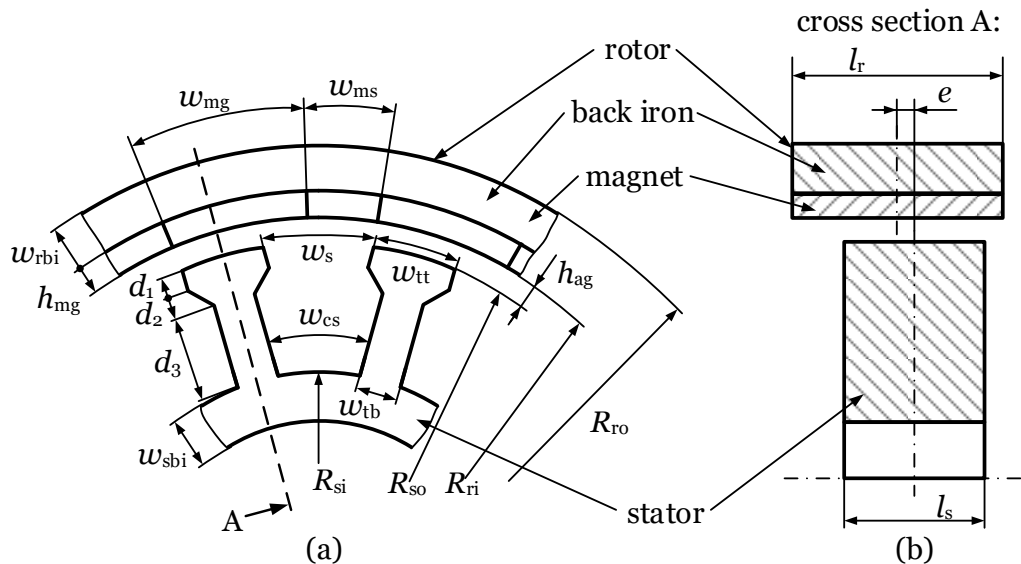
Geometry and dimensions (a) of the BLDC motor (modified form [26]) and (b) the cross sectional view.
